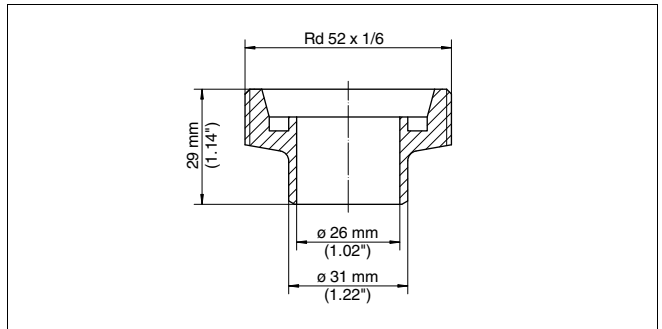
Dimensions welded socket, bolting DN 25 according to DIN 11851
